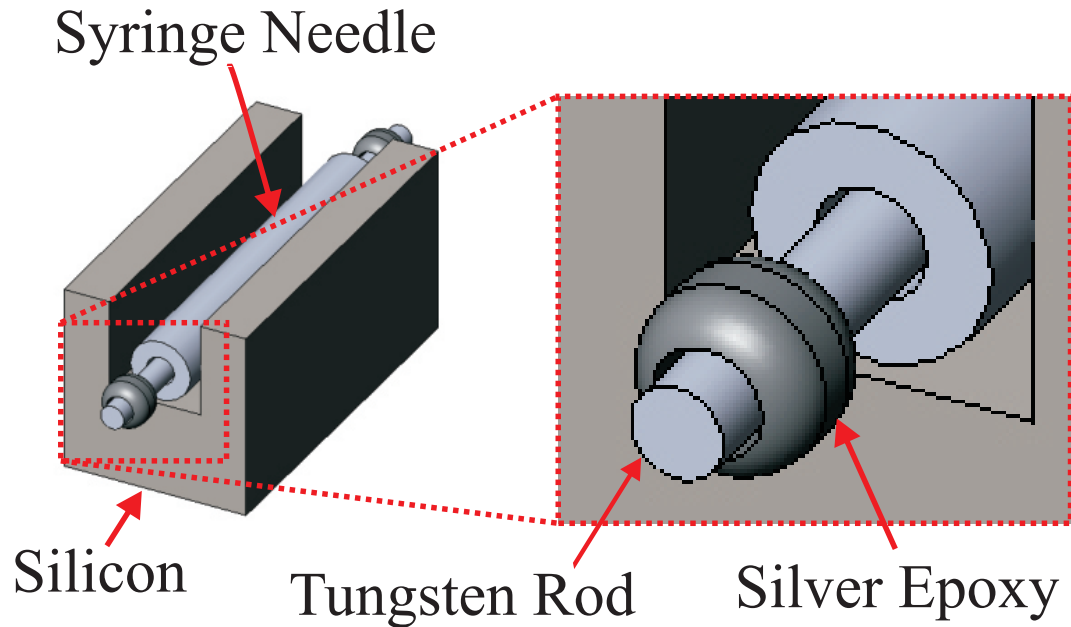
Drawing of revolute joint made from diced 1 mm thick Silicon, 165 μm inside diameter medical grade syringe needle, 162.5 μm diameter tungsten rod, and silver epoxy beads.
